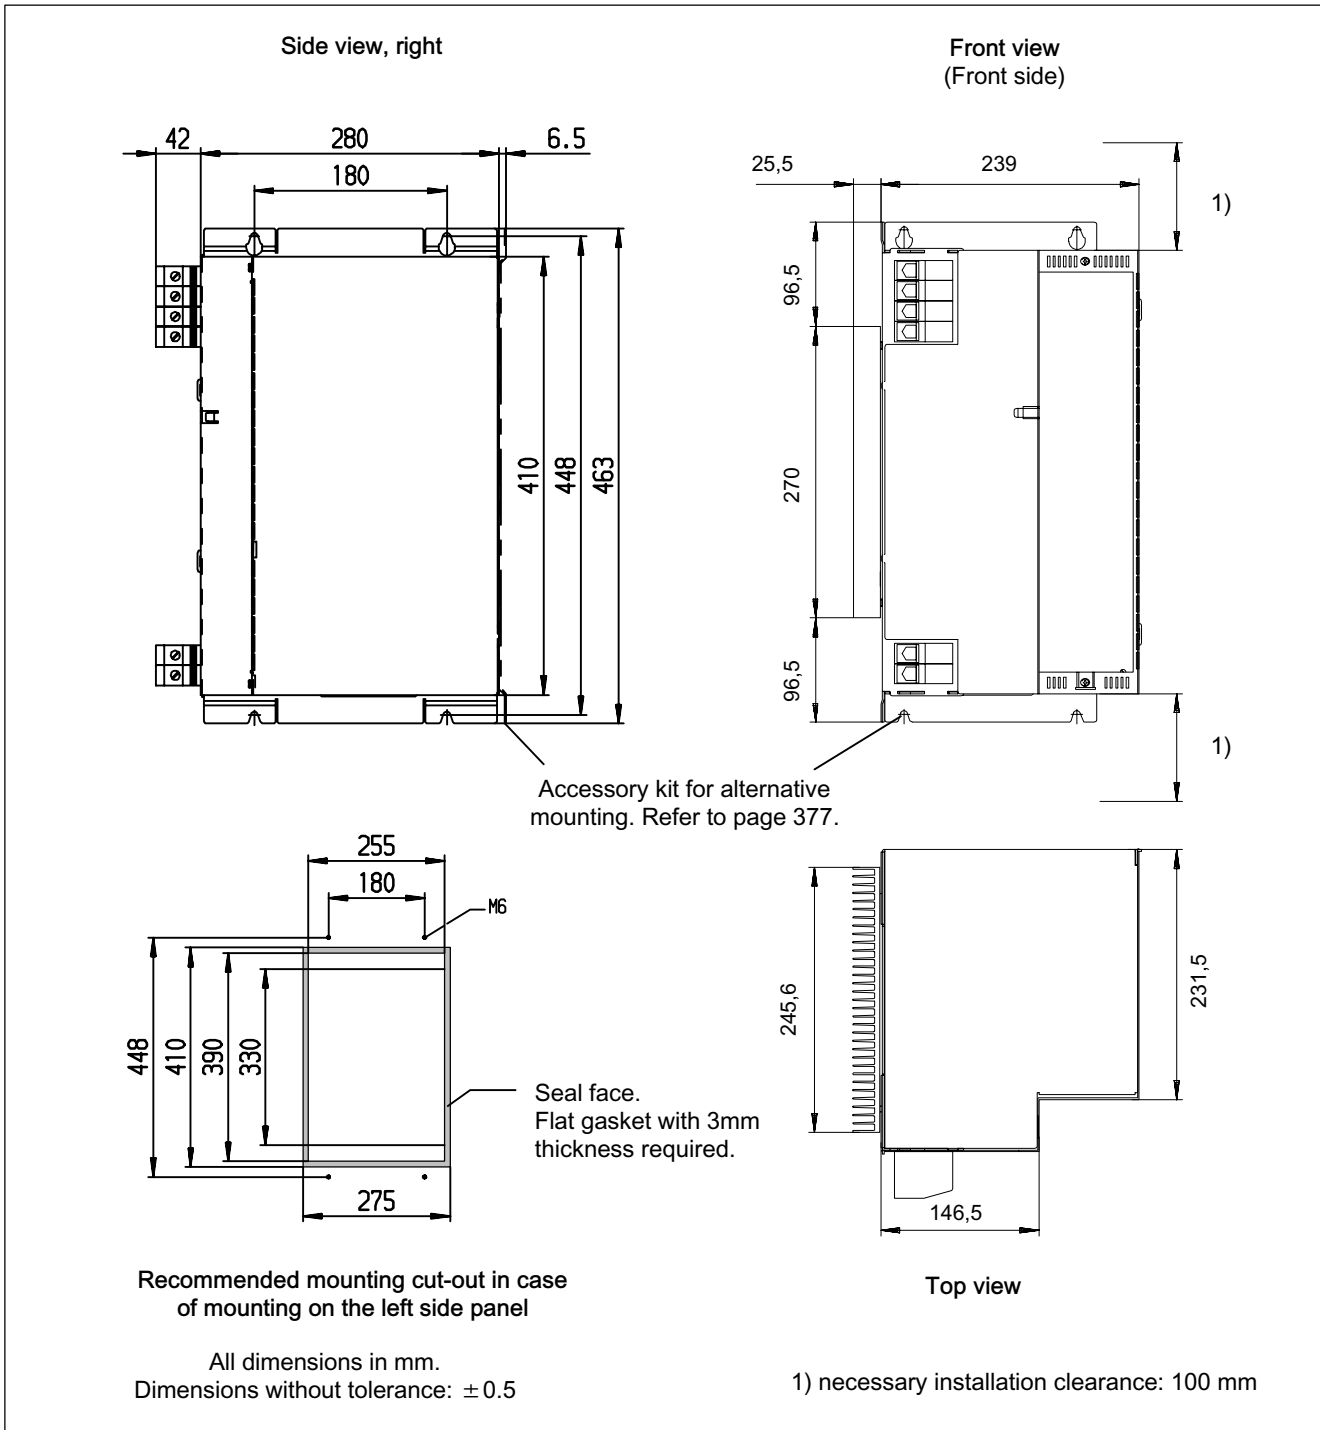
Dimensioned drawing: PSI 61xx.xxx L1
